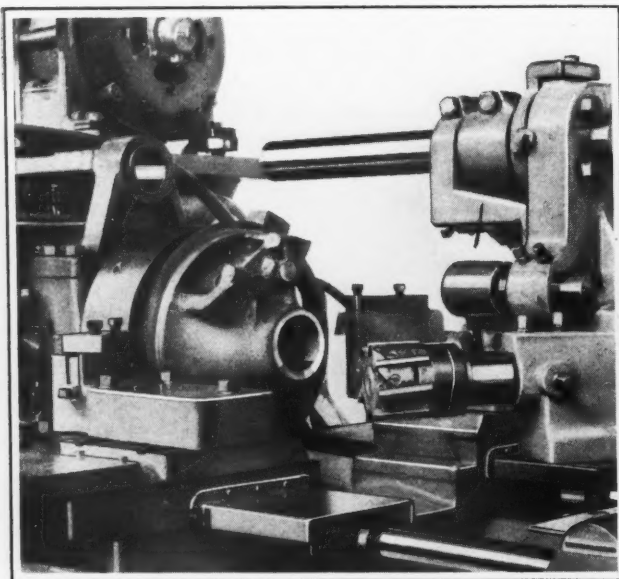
Machining a Tractor Housing with Two Sets of Tools in the Turret
